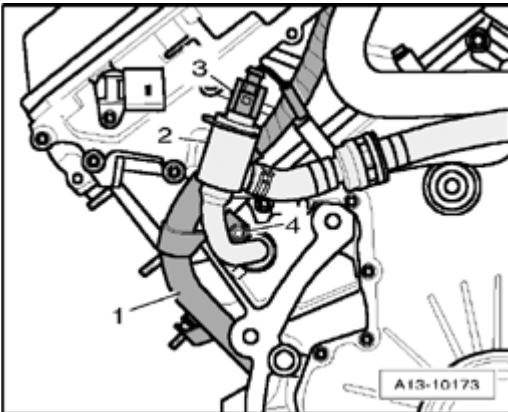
Guide Tube, Pipe Connections, Engine Coolant Temperature (ECT) Sensor G62 Electrical Harness Connector & Bolts
